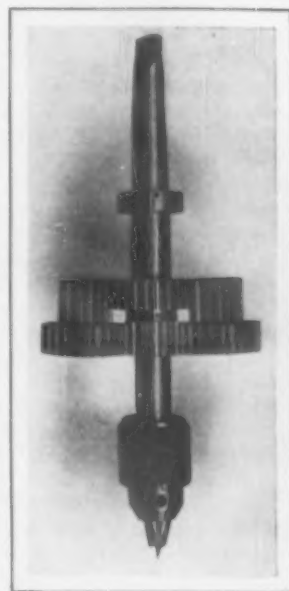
View Showing the Arrangement of All the Moving Parts of the Device
